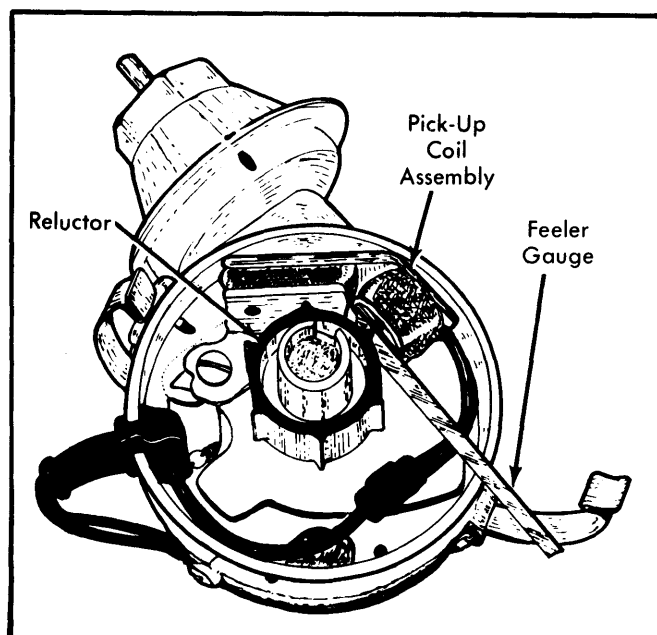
Adjusting Air Gap Between Reluctor and Pick-Up Coil
